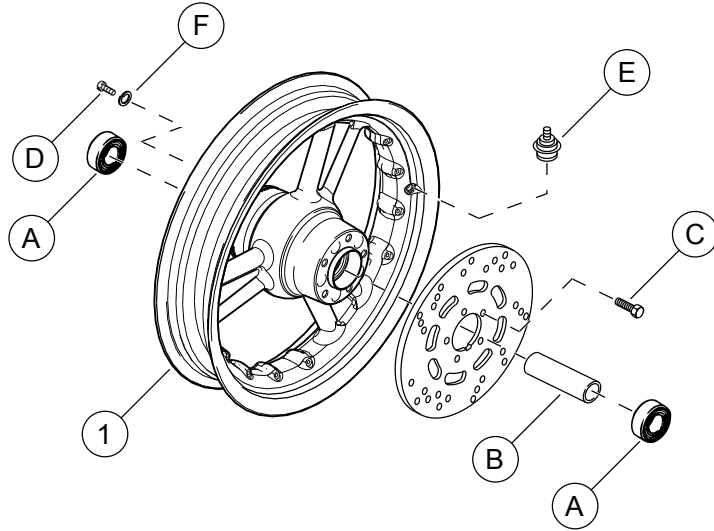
Service Parts: "Detonator" Custom Front Wheel Kits
